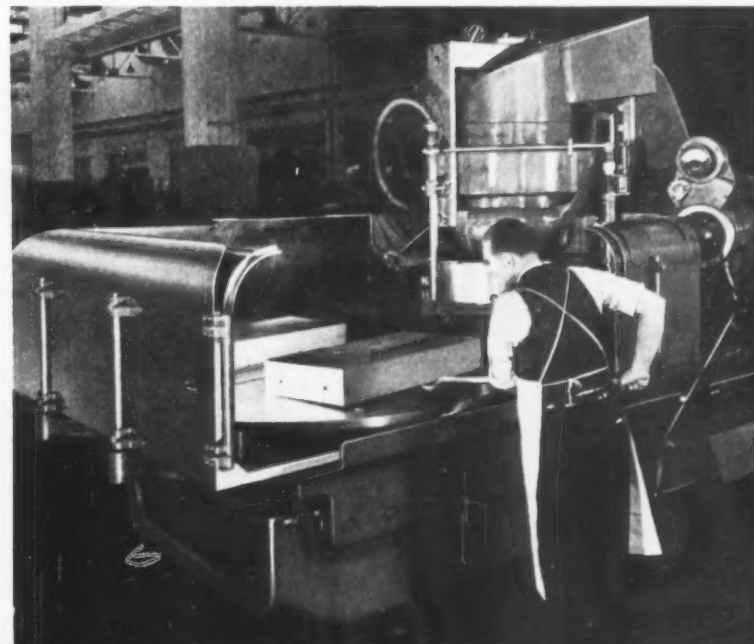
(Below) Grinding Large Sections of Boiler Plate for Use as Die Sets on a Surface Grinding Machine Equipped with a Table 7 Feet in Diameter
